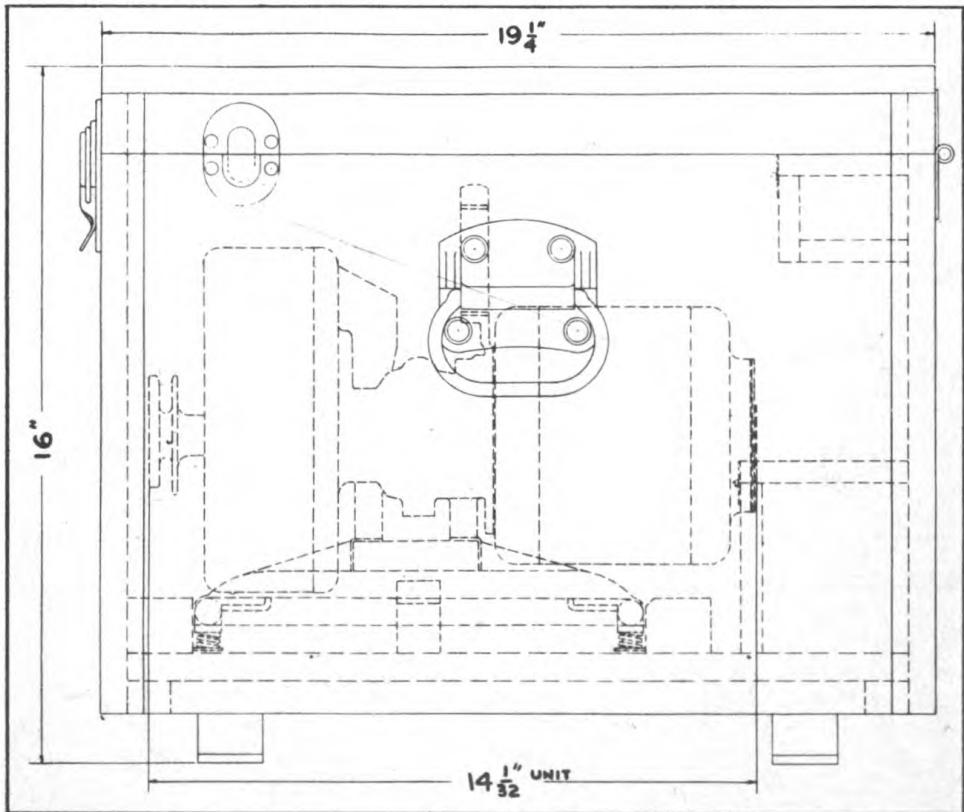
POWER UNIT PE-214-A—OVERALL DIMENSIONS
